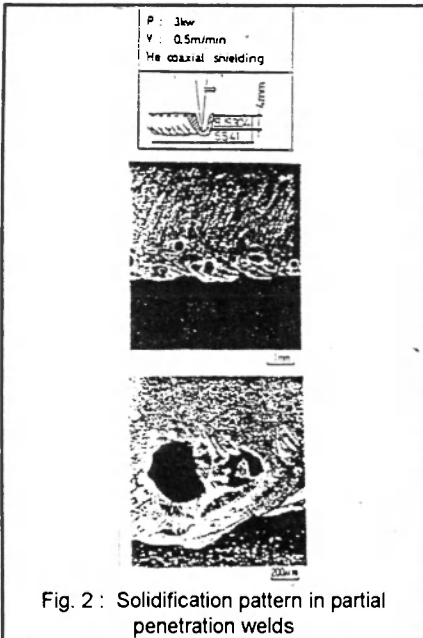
Solidification pattern in partial penetration welds
